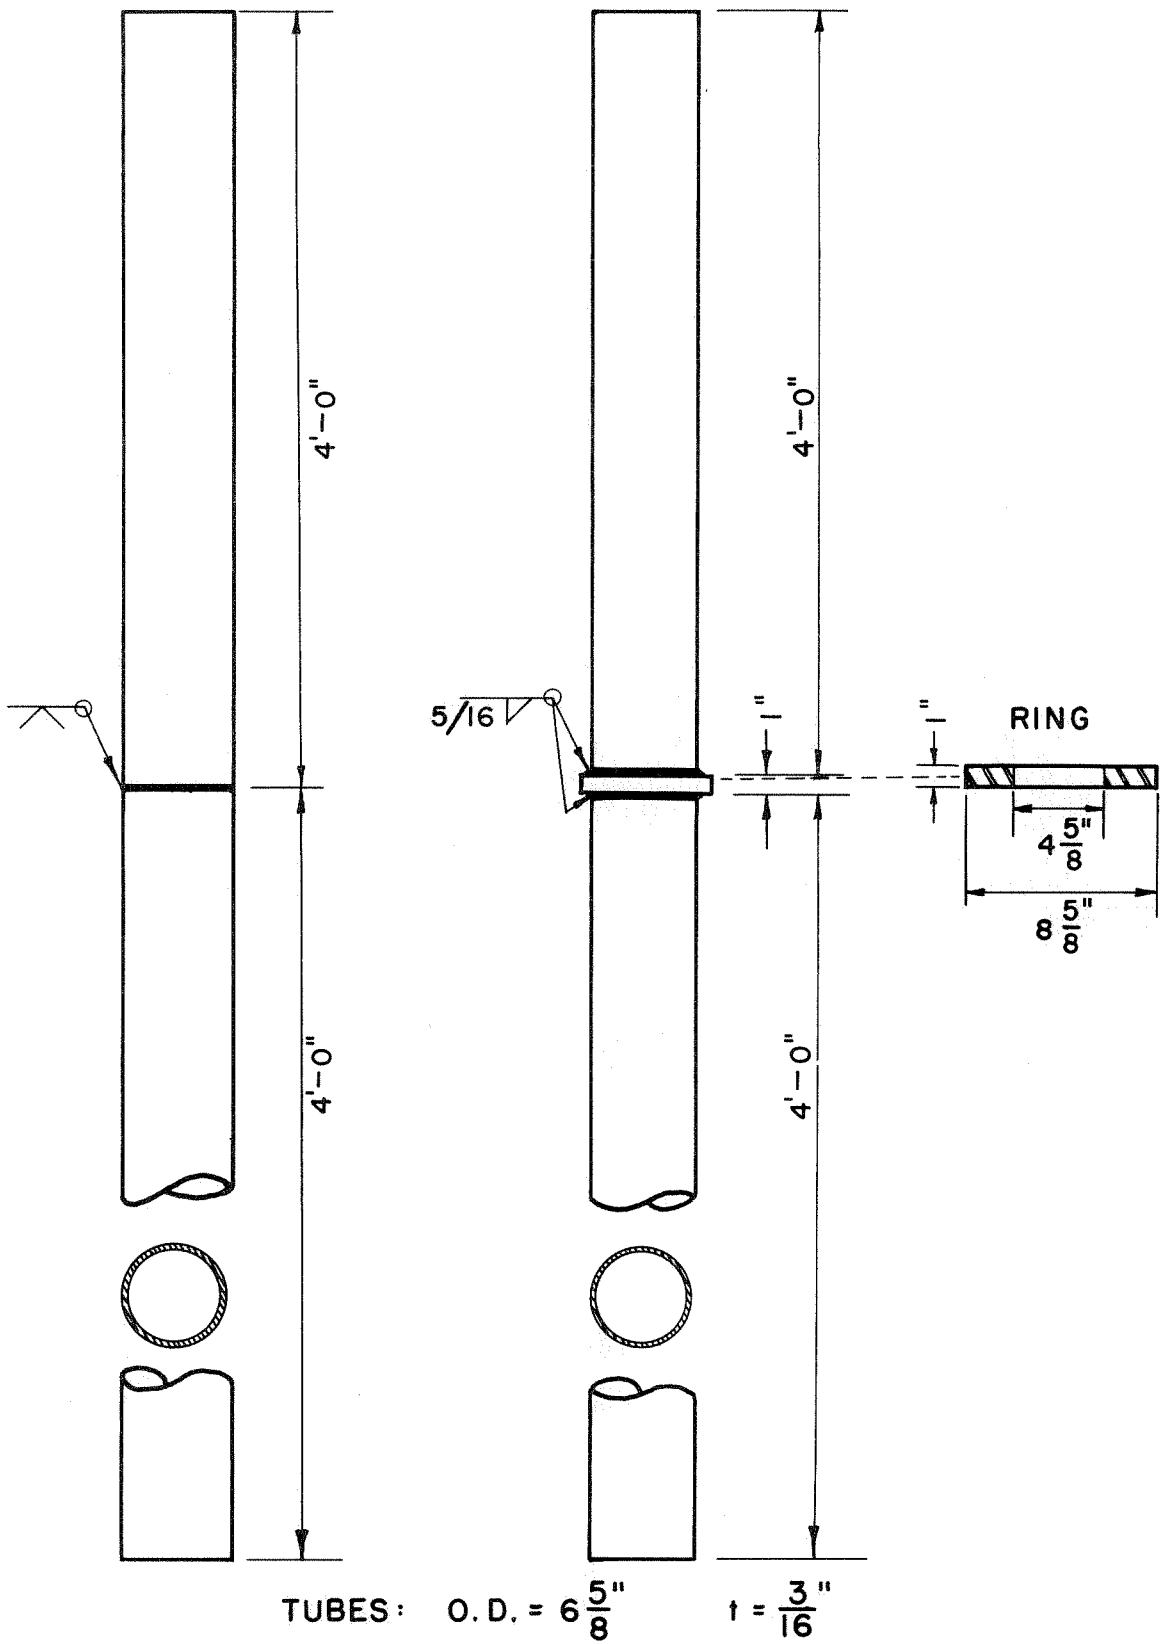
TENSILE TUBULAR TEST SPECIMENS
